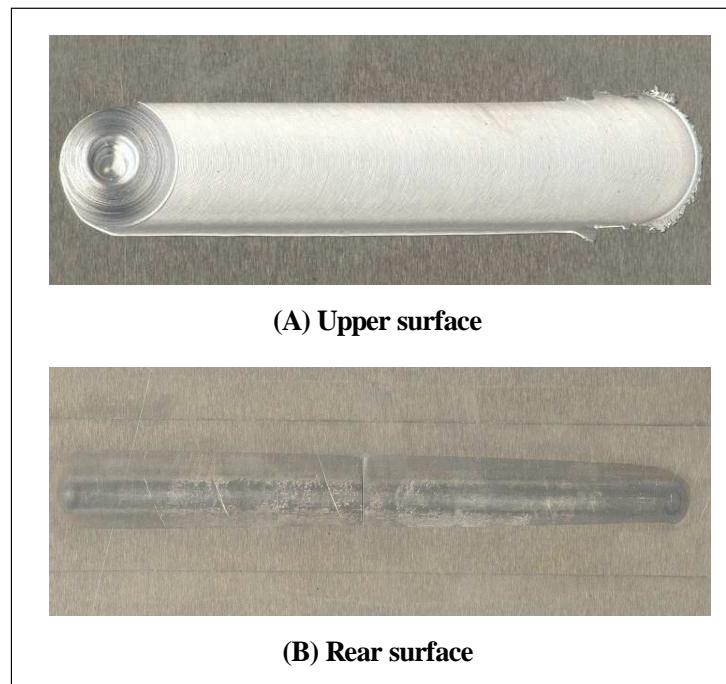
Top and bottom surface of Al6061-T6 alloy FSW butt joint. (1000rpm, 200mm/min)
